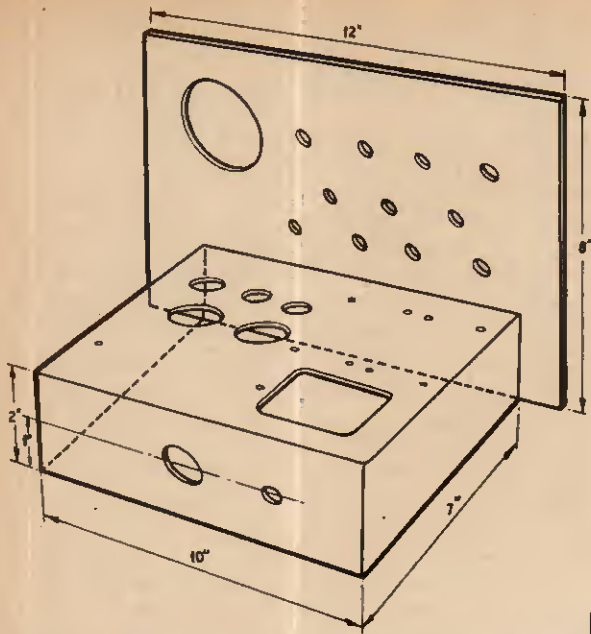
Front panel and chassis assembled. Hole sizes and positions will depend on the components actually obtained, but the wiring diagrams in Figs. 5, 6, and 7 appear half scale and give a reasonable guide to positions
